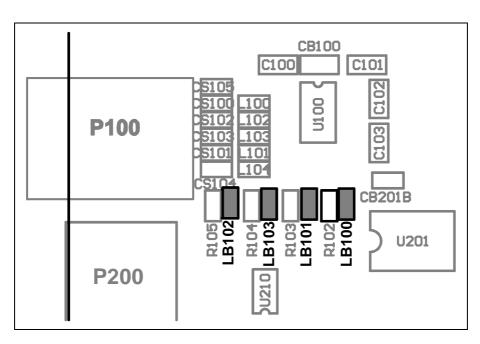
Position of the solder bridges on the board (detail drawing)
